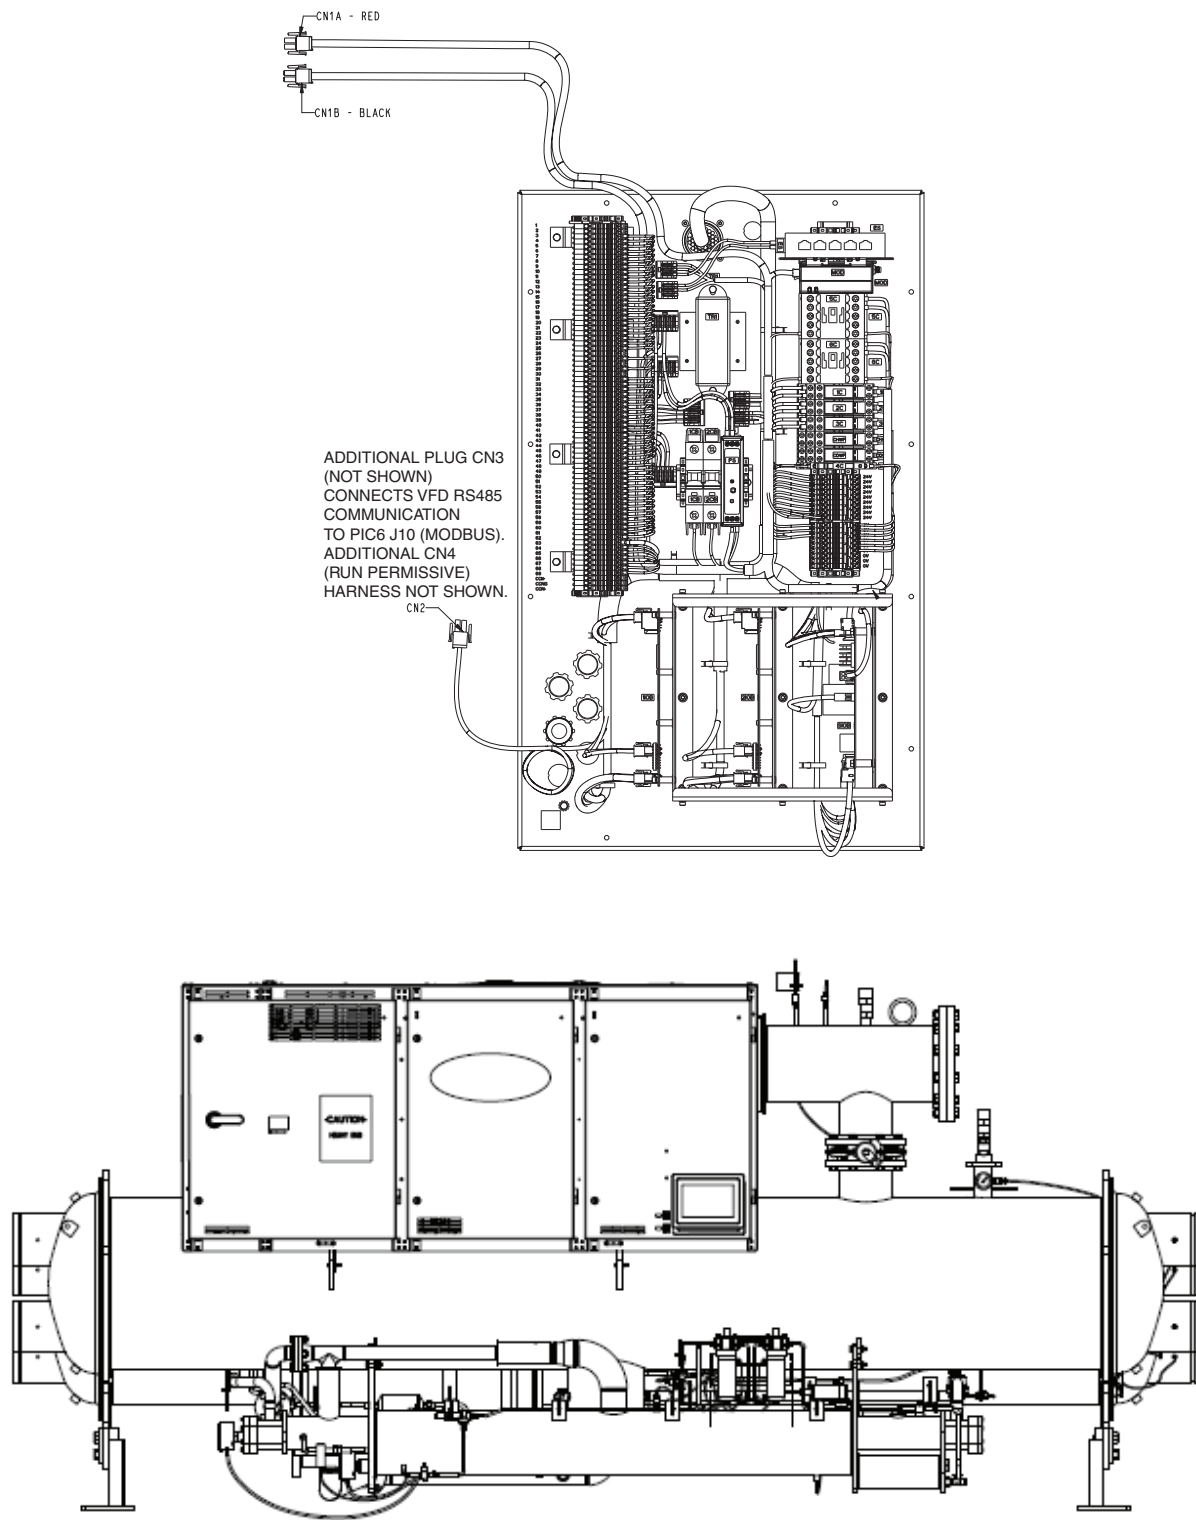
PIC6 Control Component Layout (All Compressor Units)
